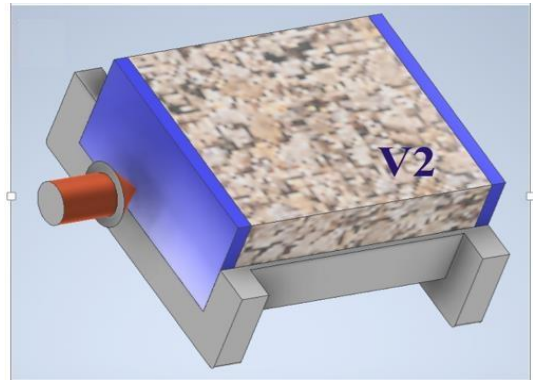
Example of arrangement of 3DP PLA (marked in blue) moulding/core box walls inside a waveguide filled with moulding sand in 2<sup>nd</sup> variant (V2)
